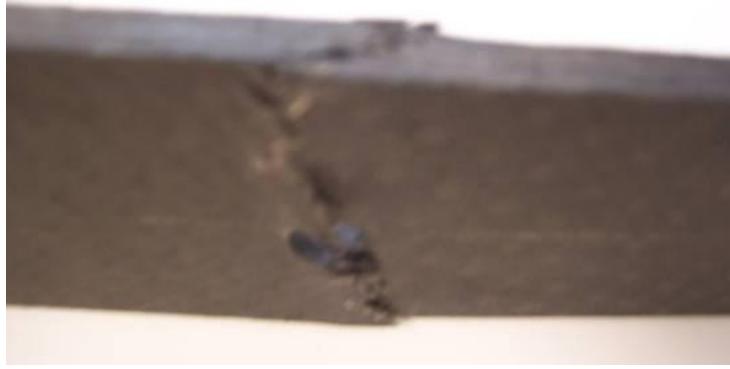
Damaged Cycom 977-20/AS4-5HS Carbon Composite Specimen After OHC Testing (Side View)
